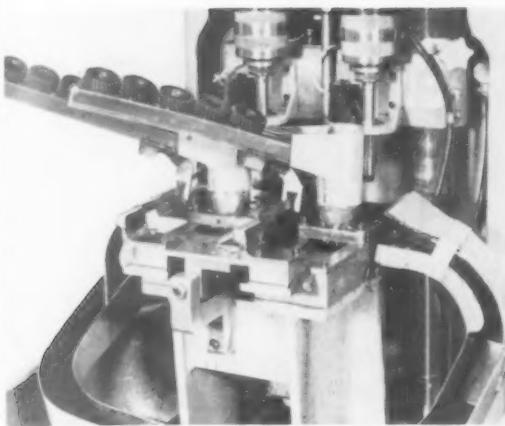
, at left, automatic loading of gears in a dual-head honing machine. The gears, descending in two chutes, drop into shutter fixtures which, after honing, retract for discharge and re-loading. Photo by courtesy of Micromatic Hone Corporation, Detroit.
